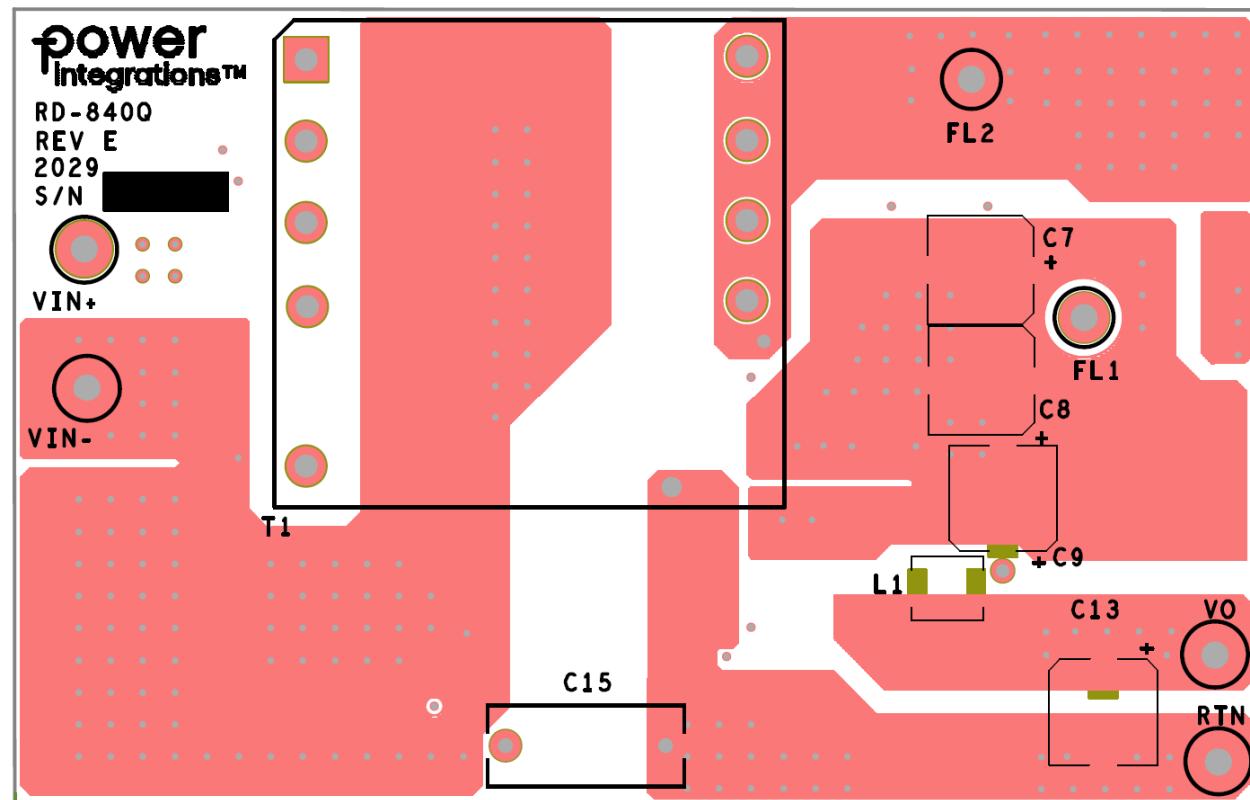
Printed Circuit Board Layout (Internal layer 2).
